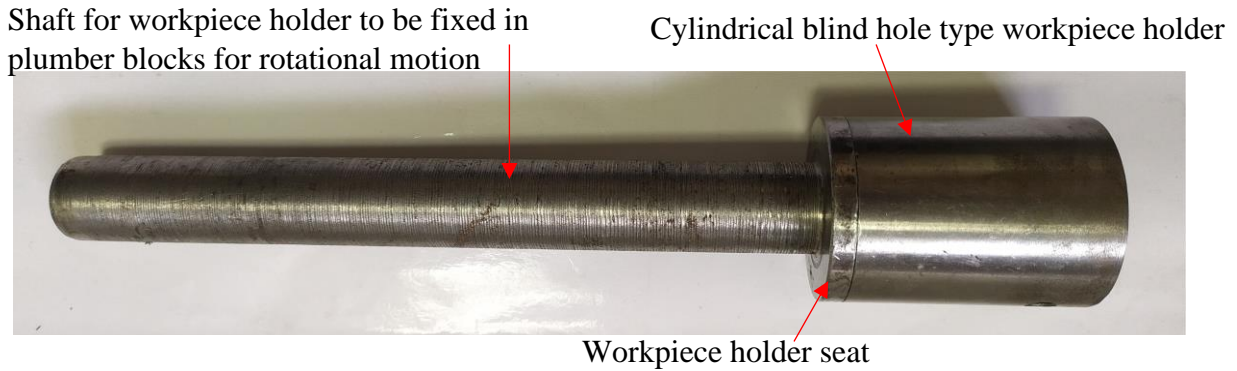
Photograph of the assembled cylindrical blind hole type workpiece fixture.
